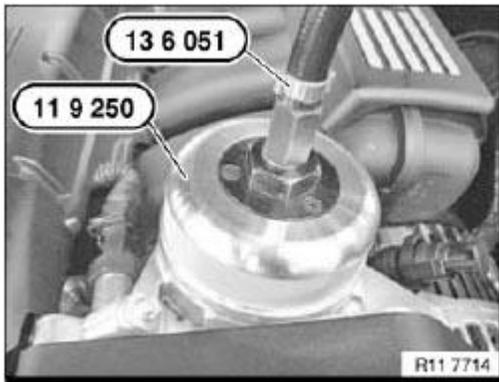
Identifying Special Tool (13 6 051 And 11 9 250)
